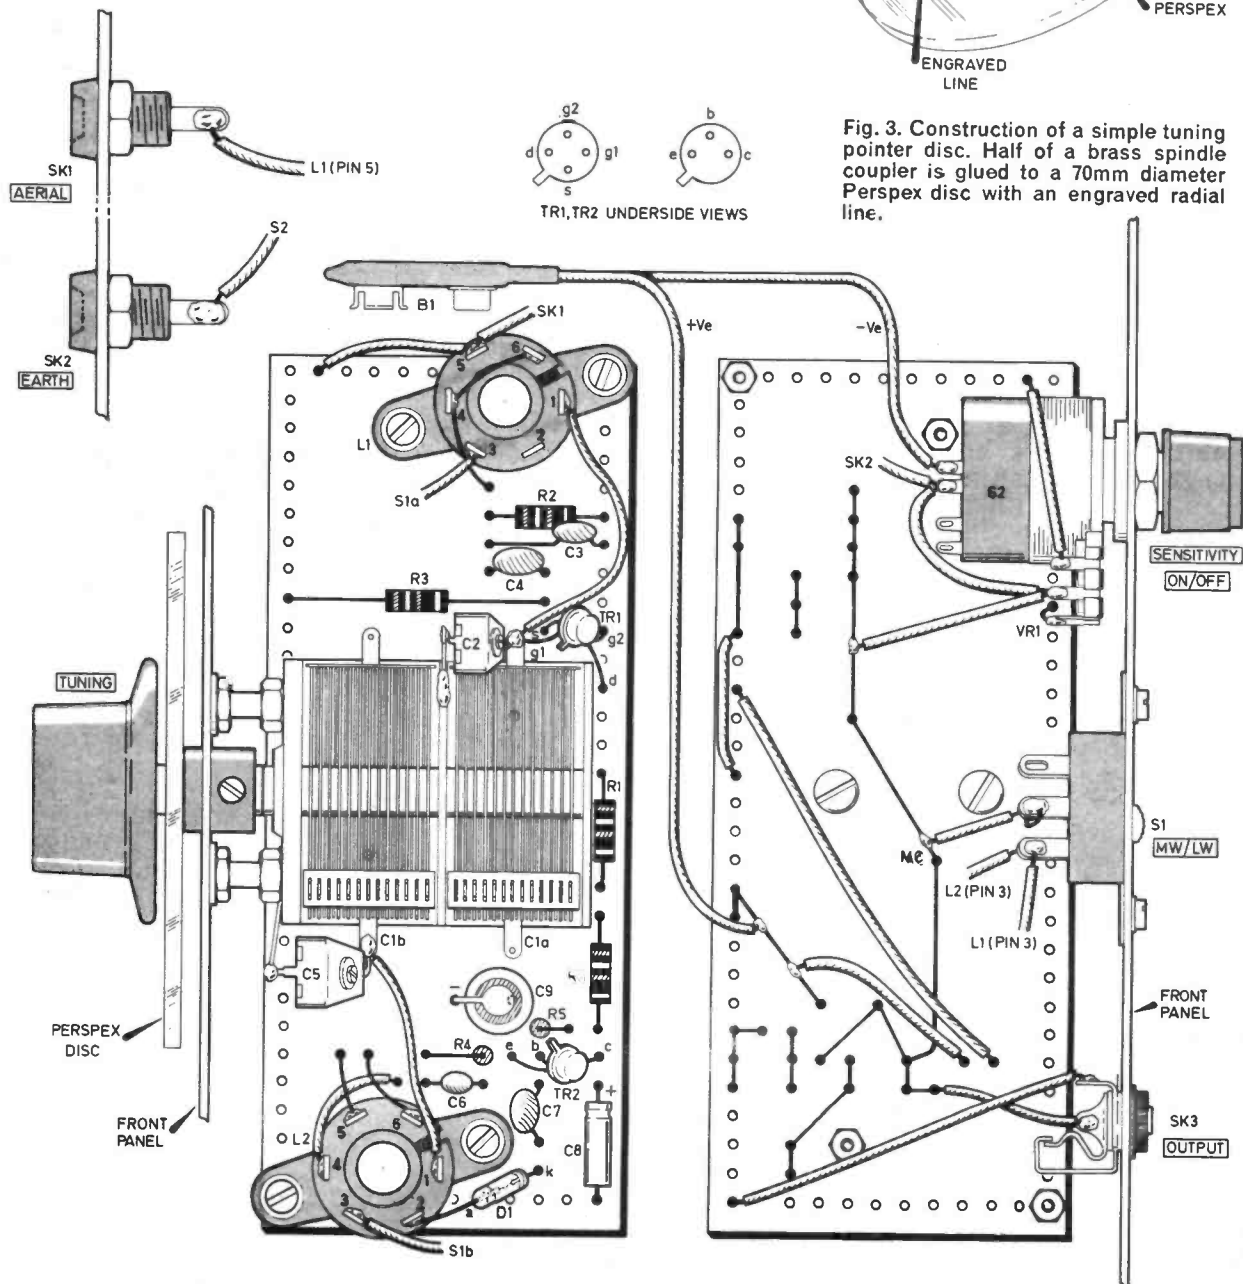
Layout and wiring of components on the top and underside of the plain perforated circuit board and interwiring to panel mounted components.
